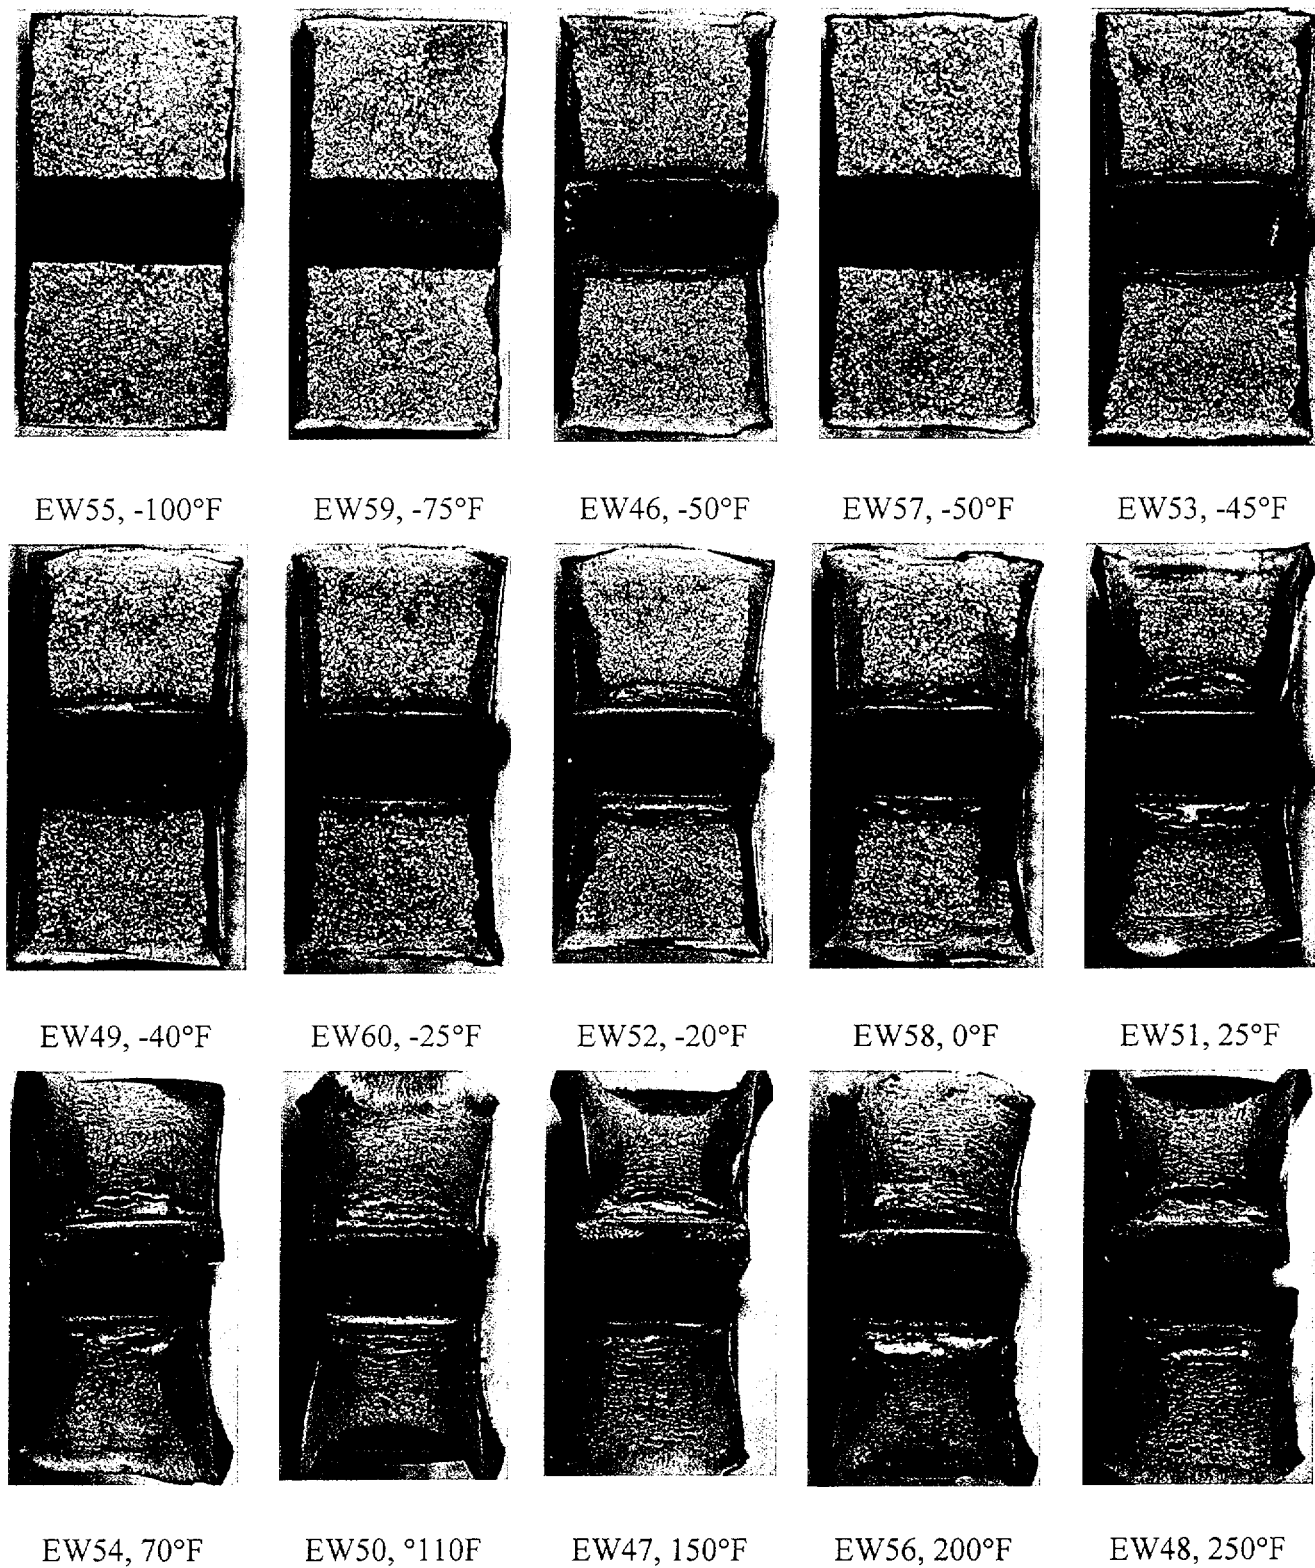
Charpy Impact Specimen Fracture Surfaces for Millstone Unit 3 Reactor Vessel Weld Metal
